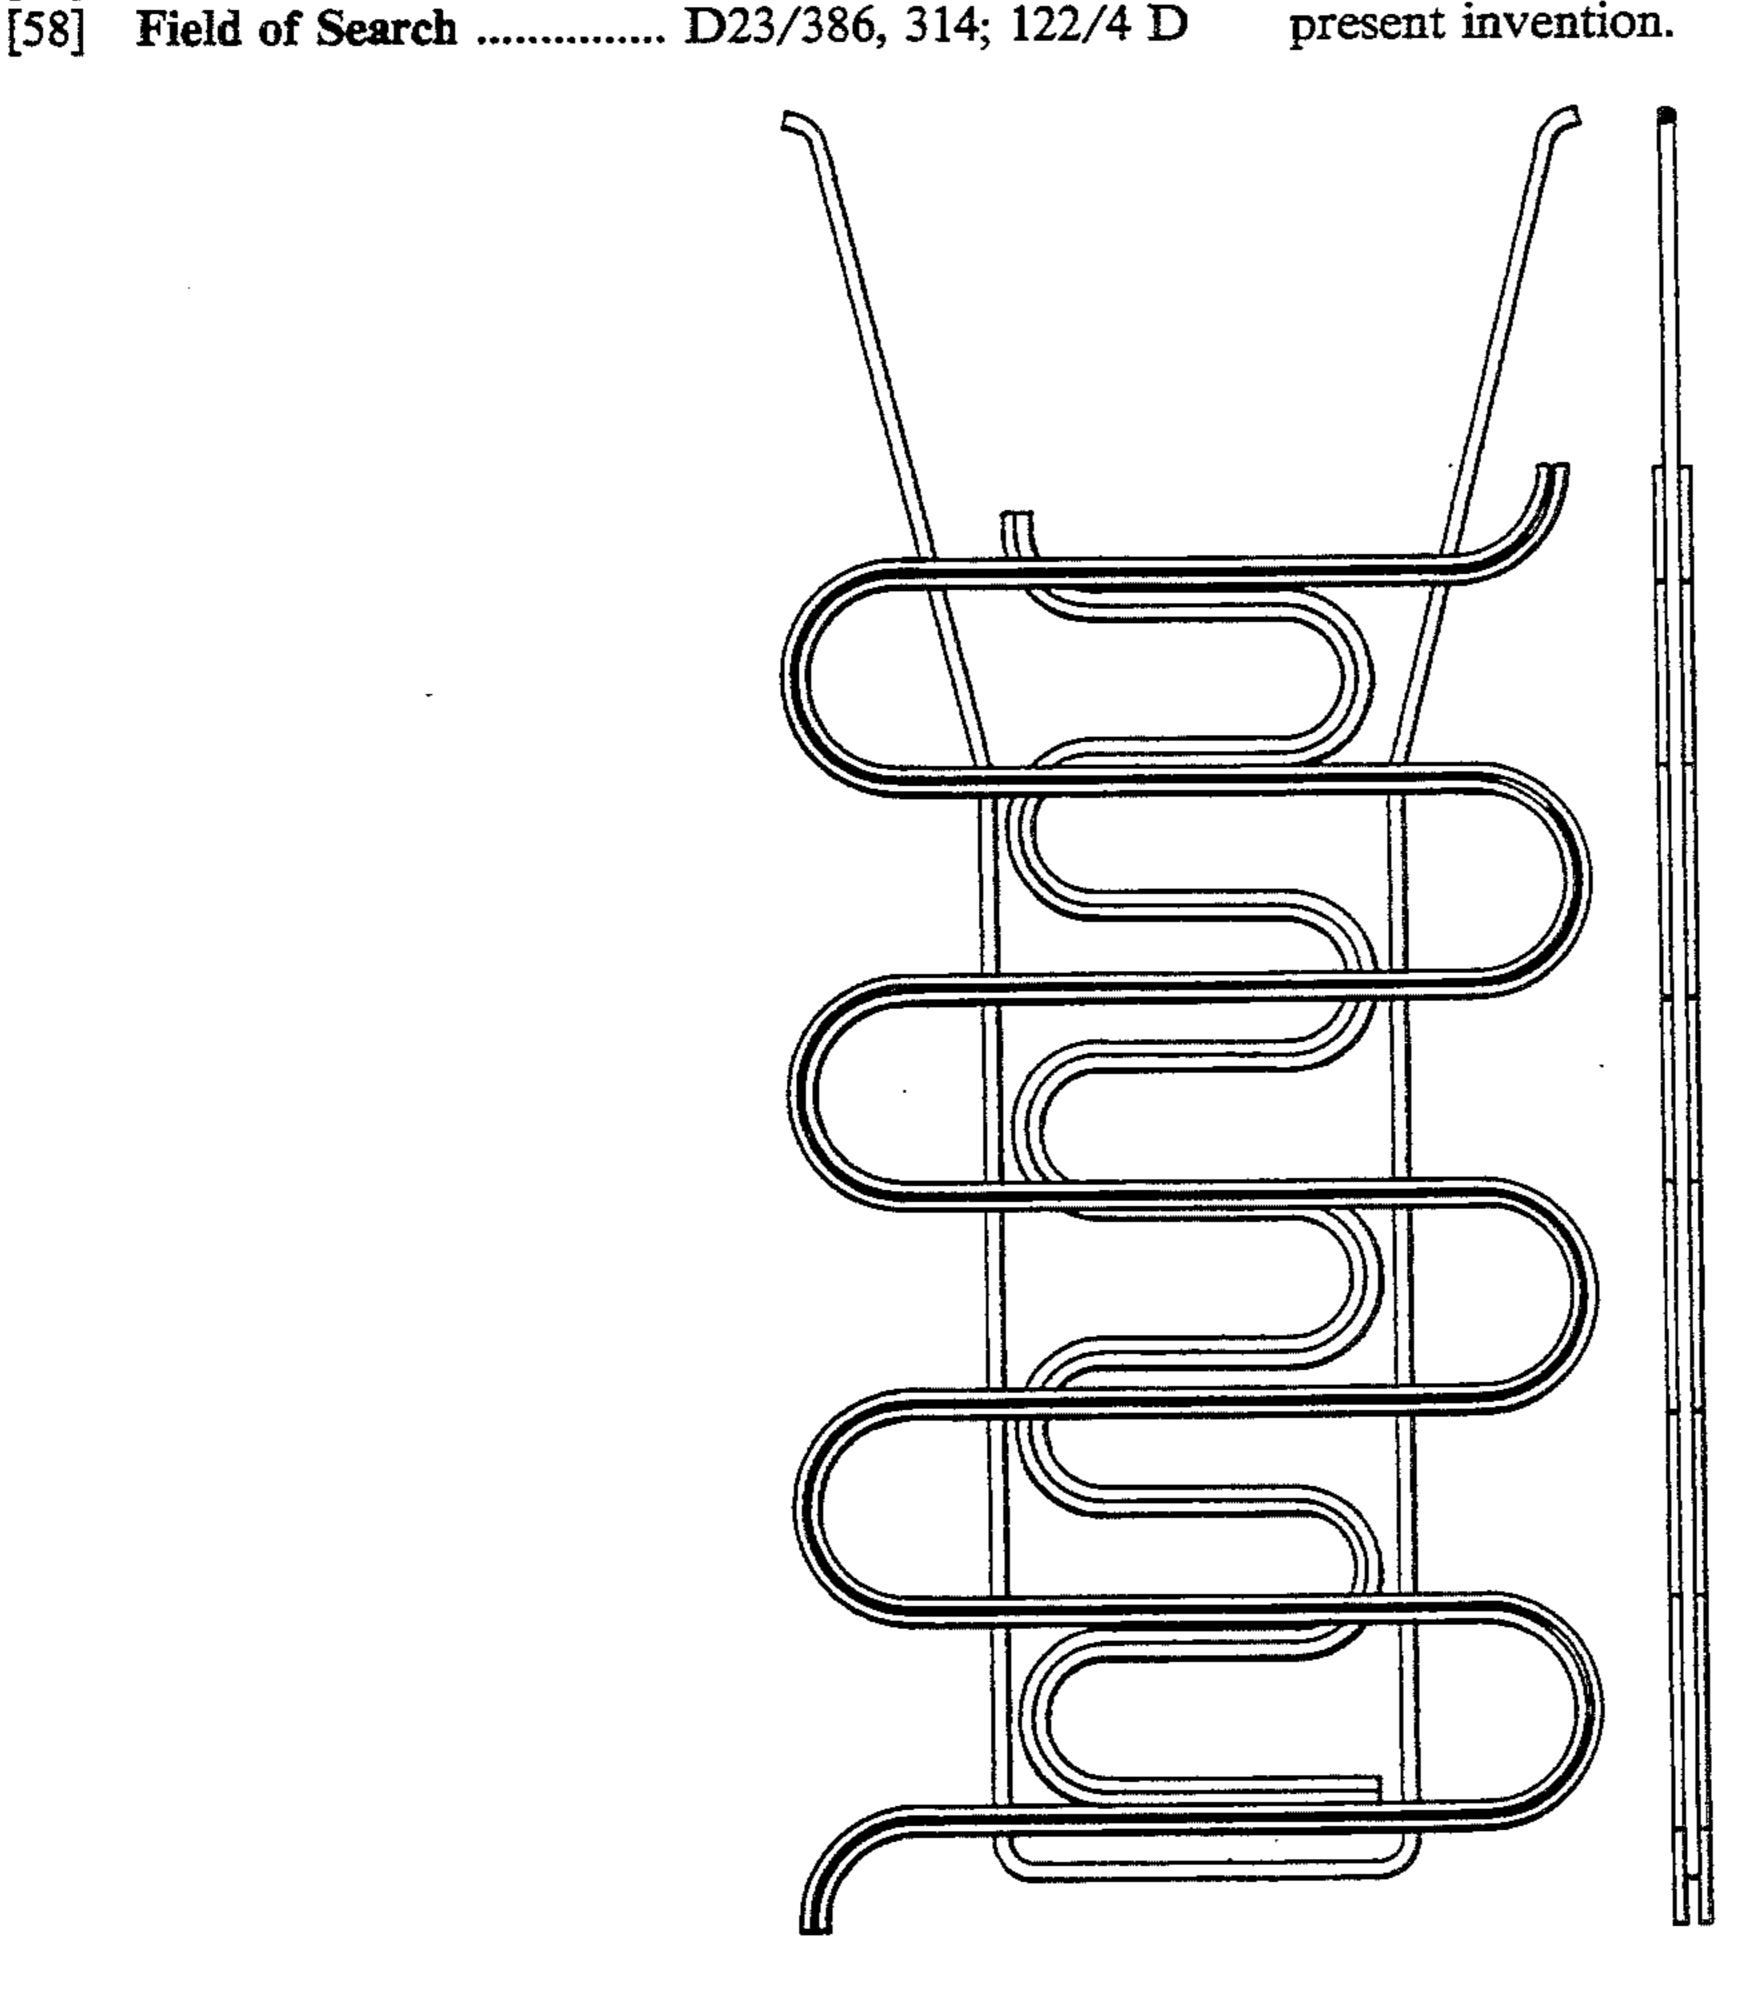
is a right side view of the tubing assembly unit of the present invention;
